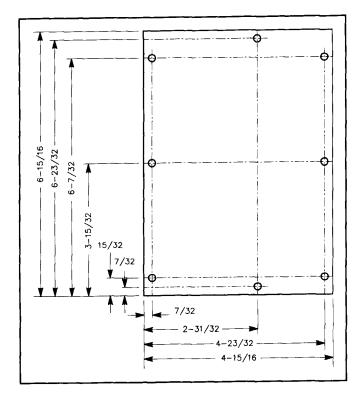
Side-chassis cover plates (2 required). Holes are No. 19. Use cover plates as templates to drill side chassis.
